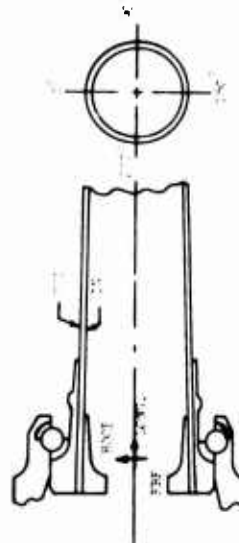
STRAIN-GAGE INSTALLATION. LOCATIONS 1 THROUGH 6
